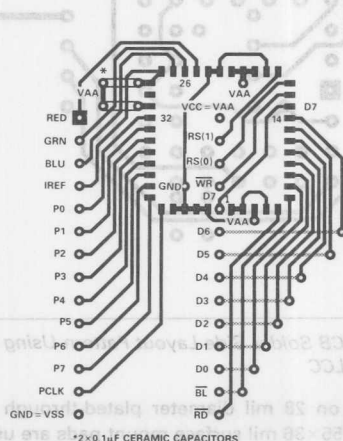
X-Ray View of Layout Using Surface Mounted PLCC
